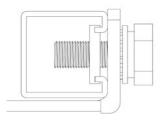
Corner bracket to rail assembly for all brackets (Refer to Support Rail Assembly)
